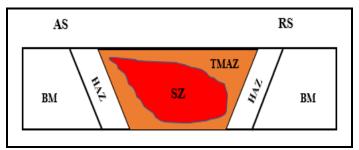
A schematic showing cross section image of FSW weld nugget and its main four regions SZ, TMAZ, HAZ, and base metal (BM) with the identification of both sides AS and RS.
